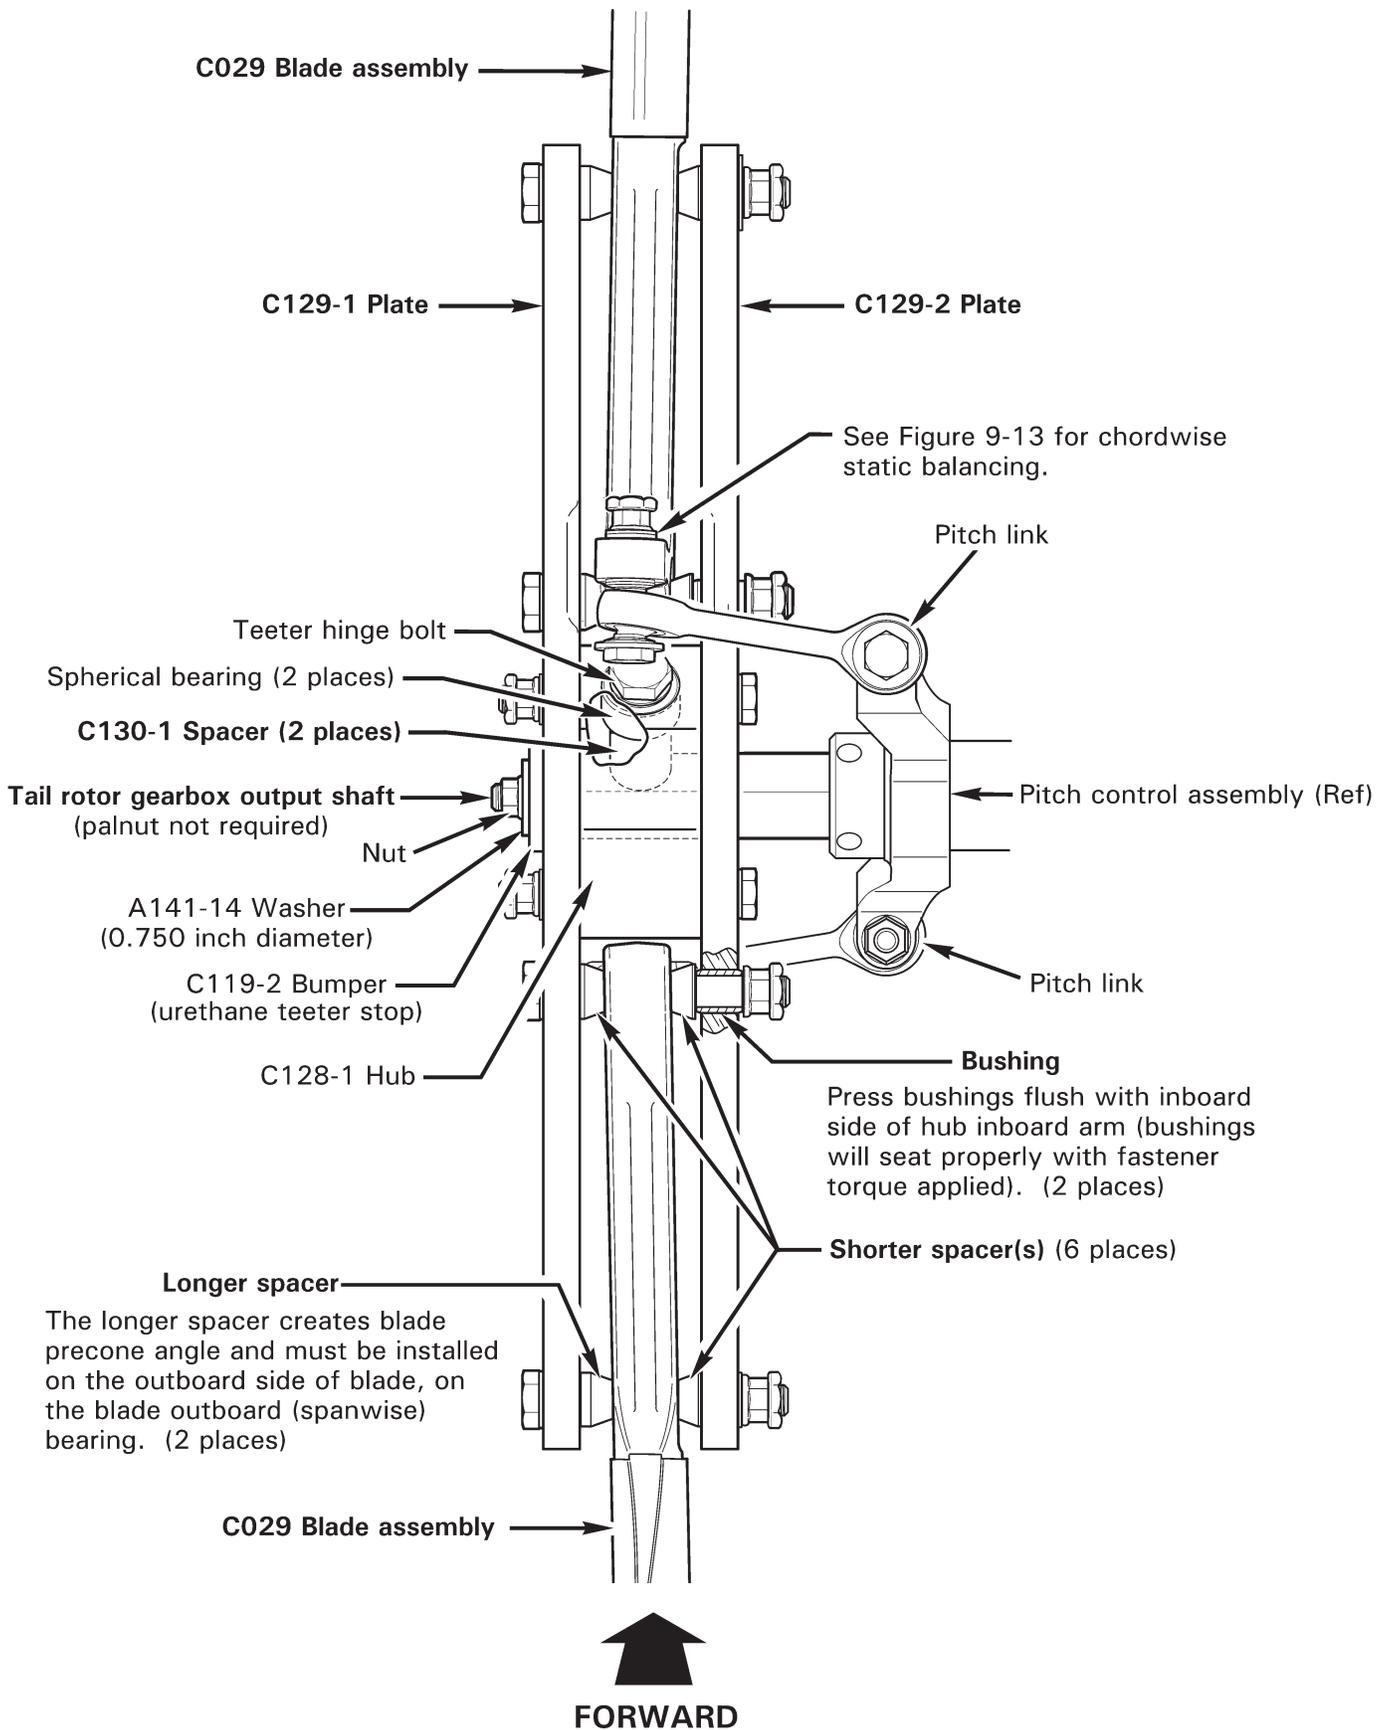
THREE-PIECE HUB TAIL ROTOR ASSEMBLY INSTALLATION
